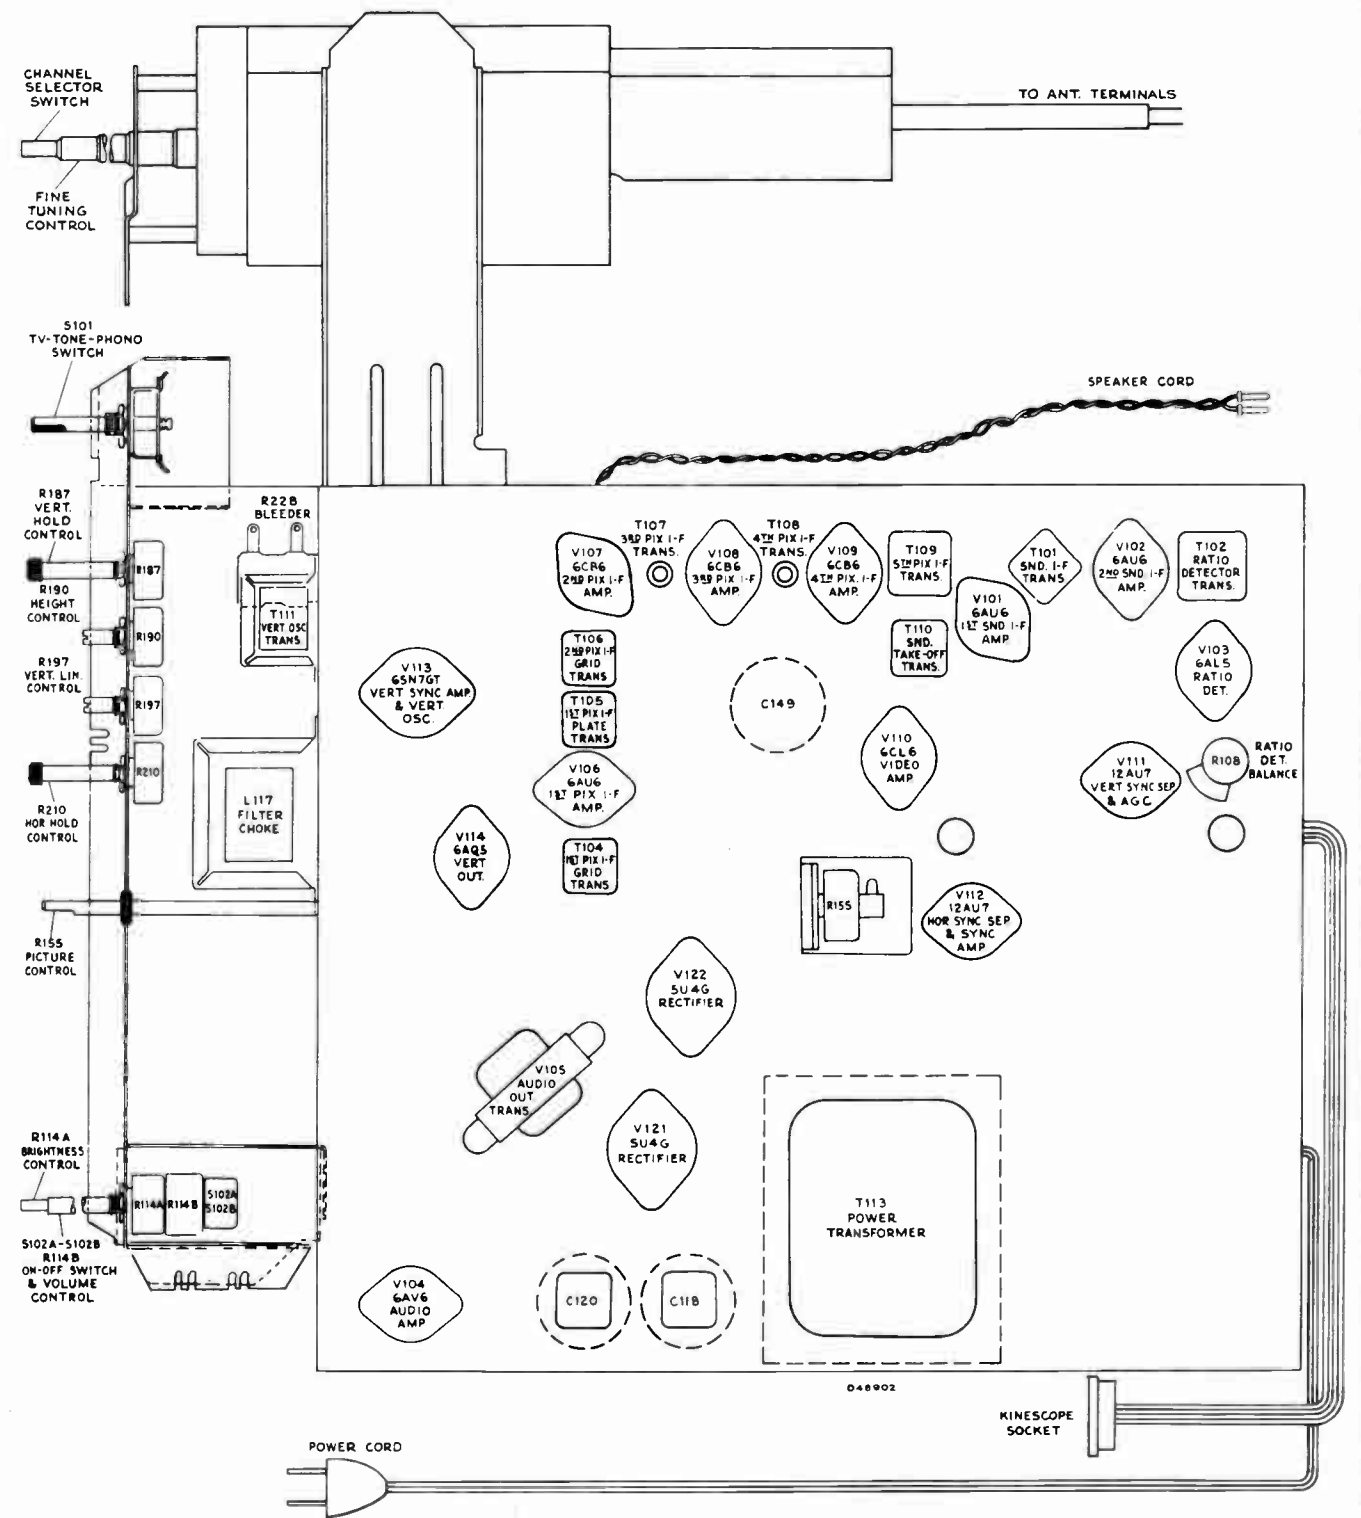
Television Chassis Bottom View (shown with KRK29 Tuner)
